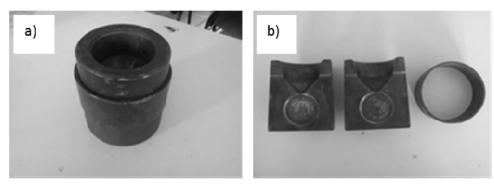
Mold for coin test pieces before casting (a) and dismantled (b)
